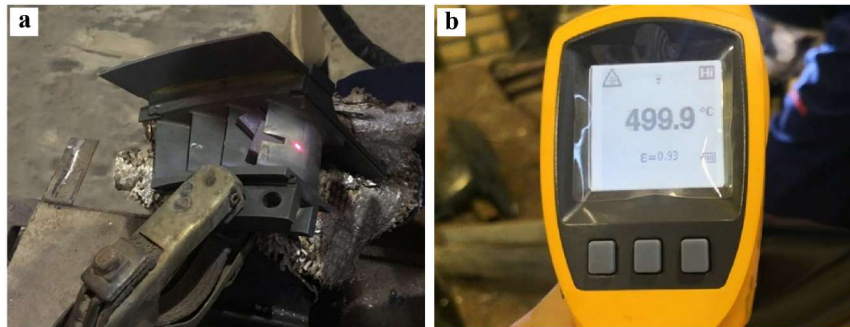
Experimental measurement of temperature during repair welding process of the gas turbine nozzle (a) gas turbine nozzle before welding process, (b) recording temperature during welding process.
